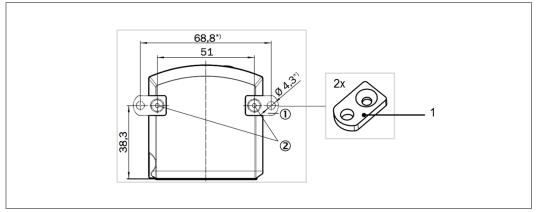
Assembly drawing of the mounting kit for the TIM laser scanner
